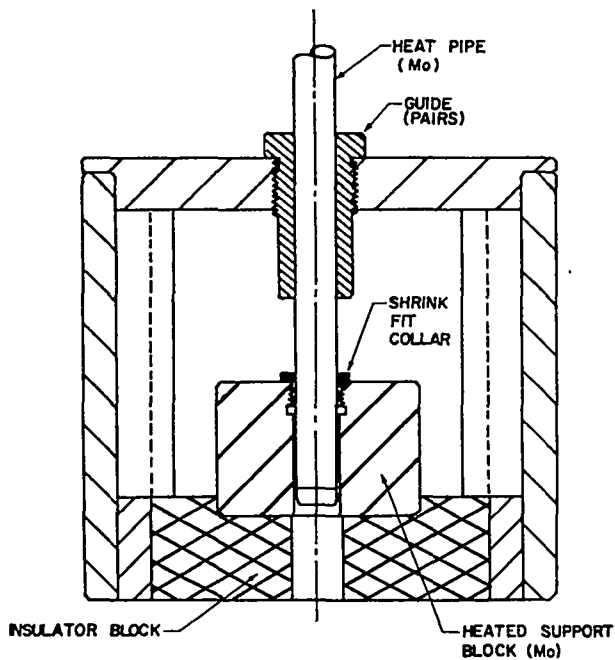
Fixture for shrink-fitting threaded collar on molybdenum core heat pipe.
